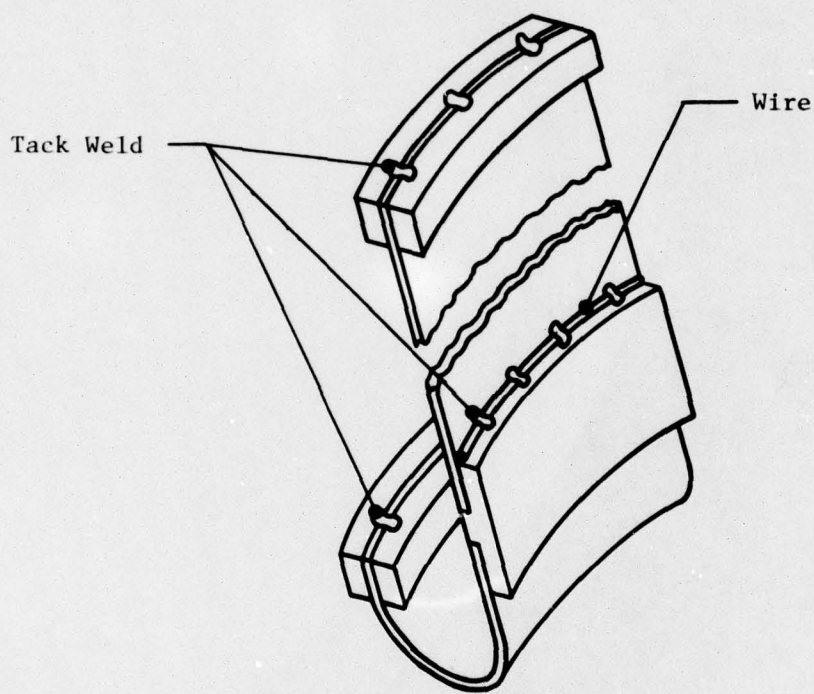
Sketch of Tack-Welding Arrangement
